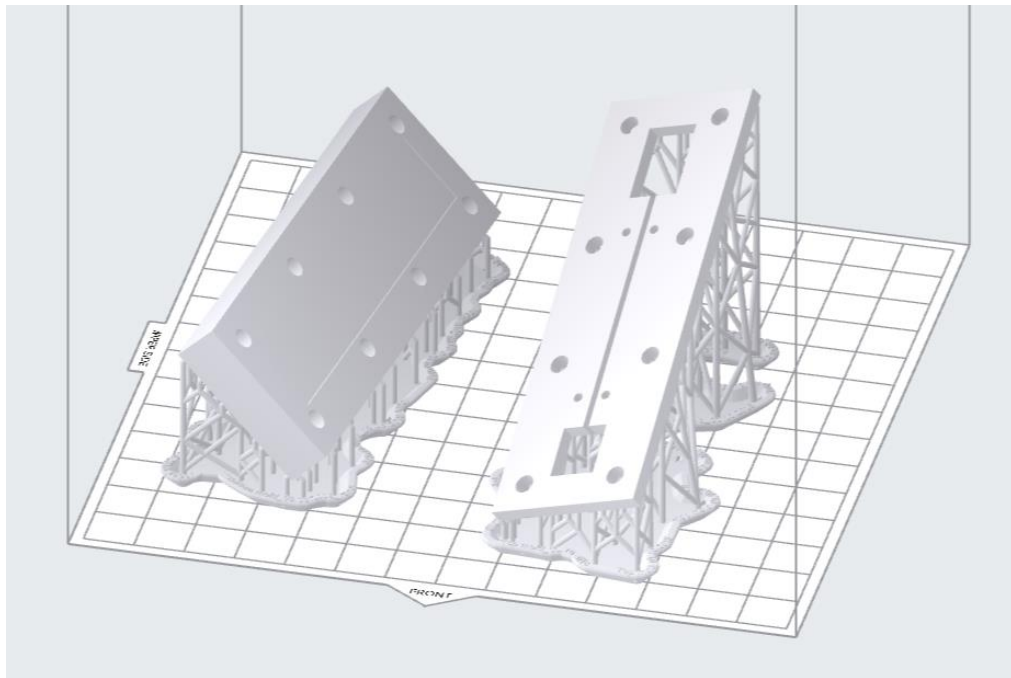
The screen of the interface used to make it suitable for three-dimensional printing by adding support parts to designed molds.
